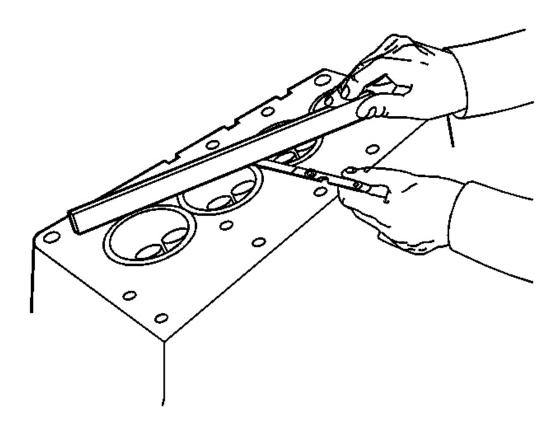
Inspecting Cylinder Head For Warpage Courtesy of GENERAL MOTORS CORP.
